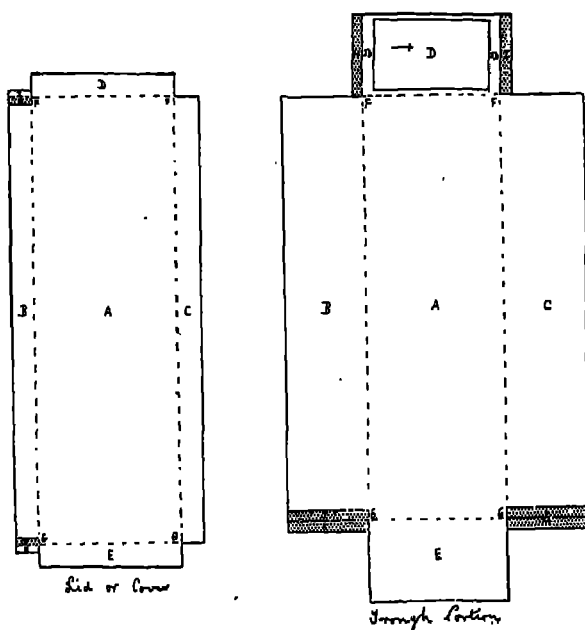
TWO-PIECE SINGLE-THOUSAND ENVELOPE PACKING EXAMPLE.
